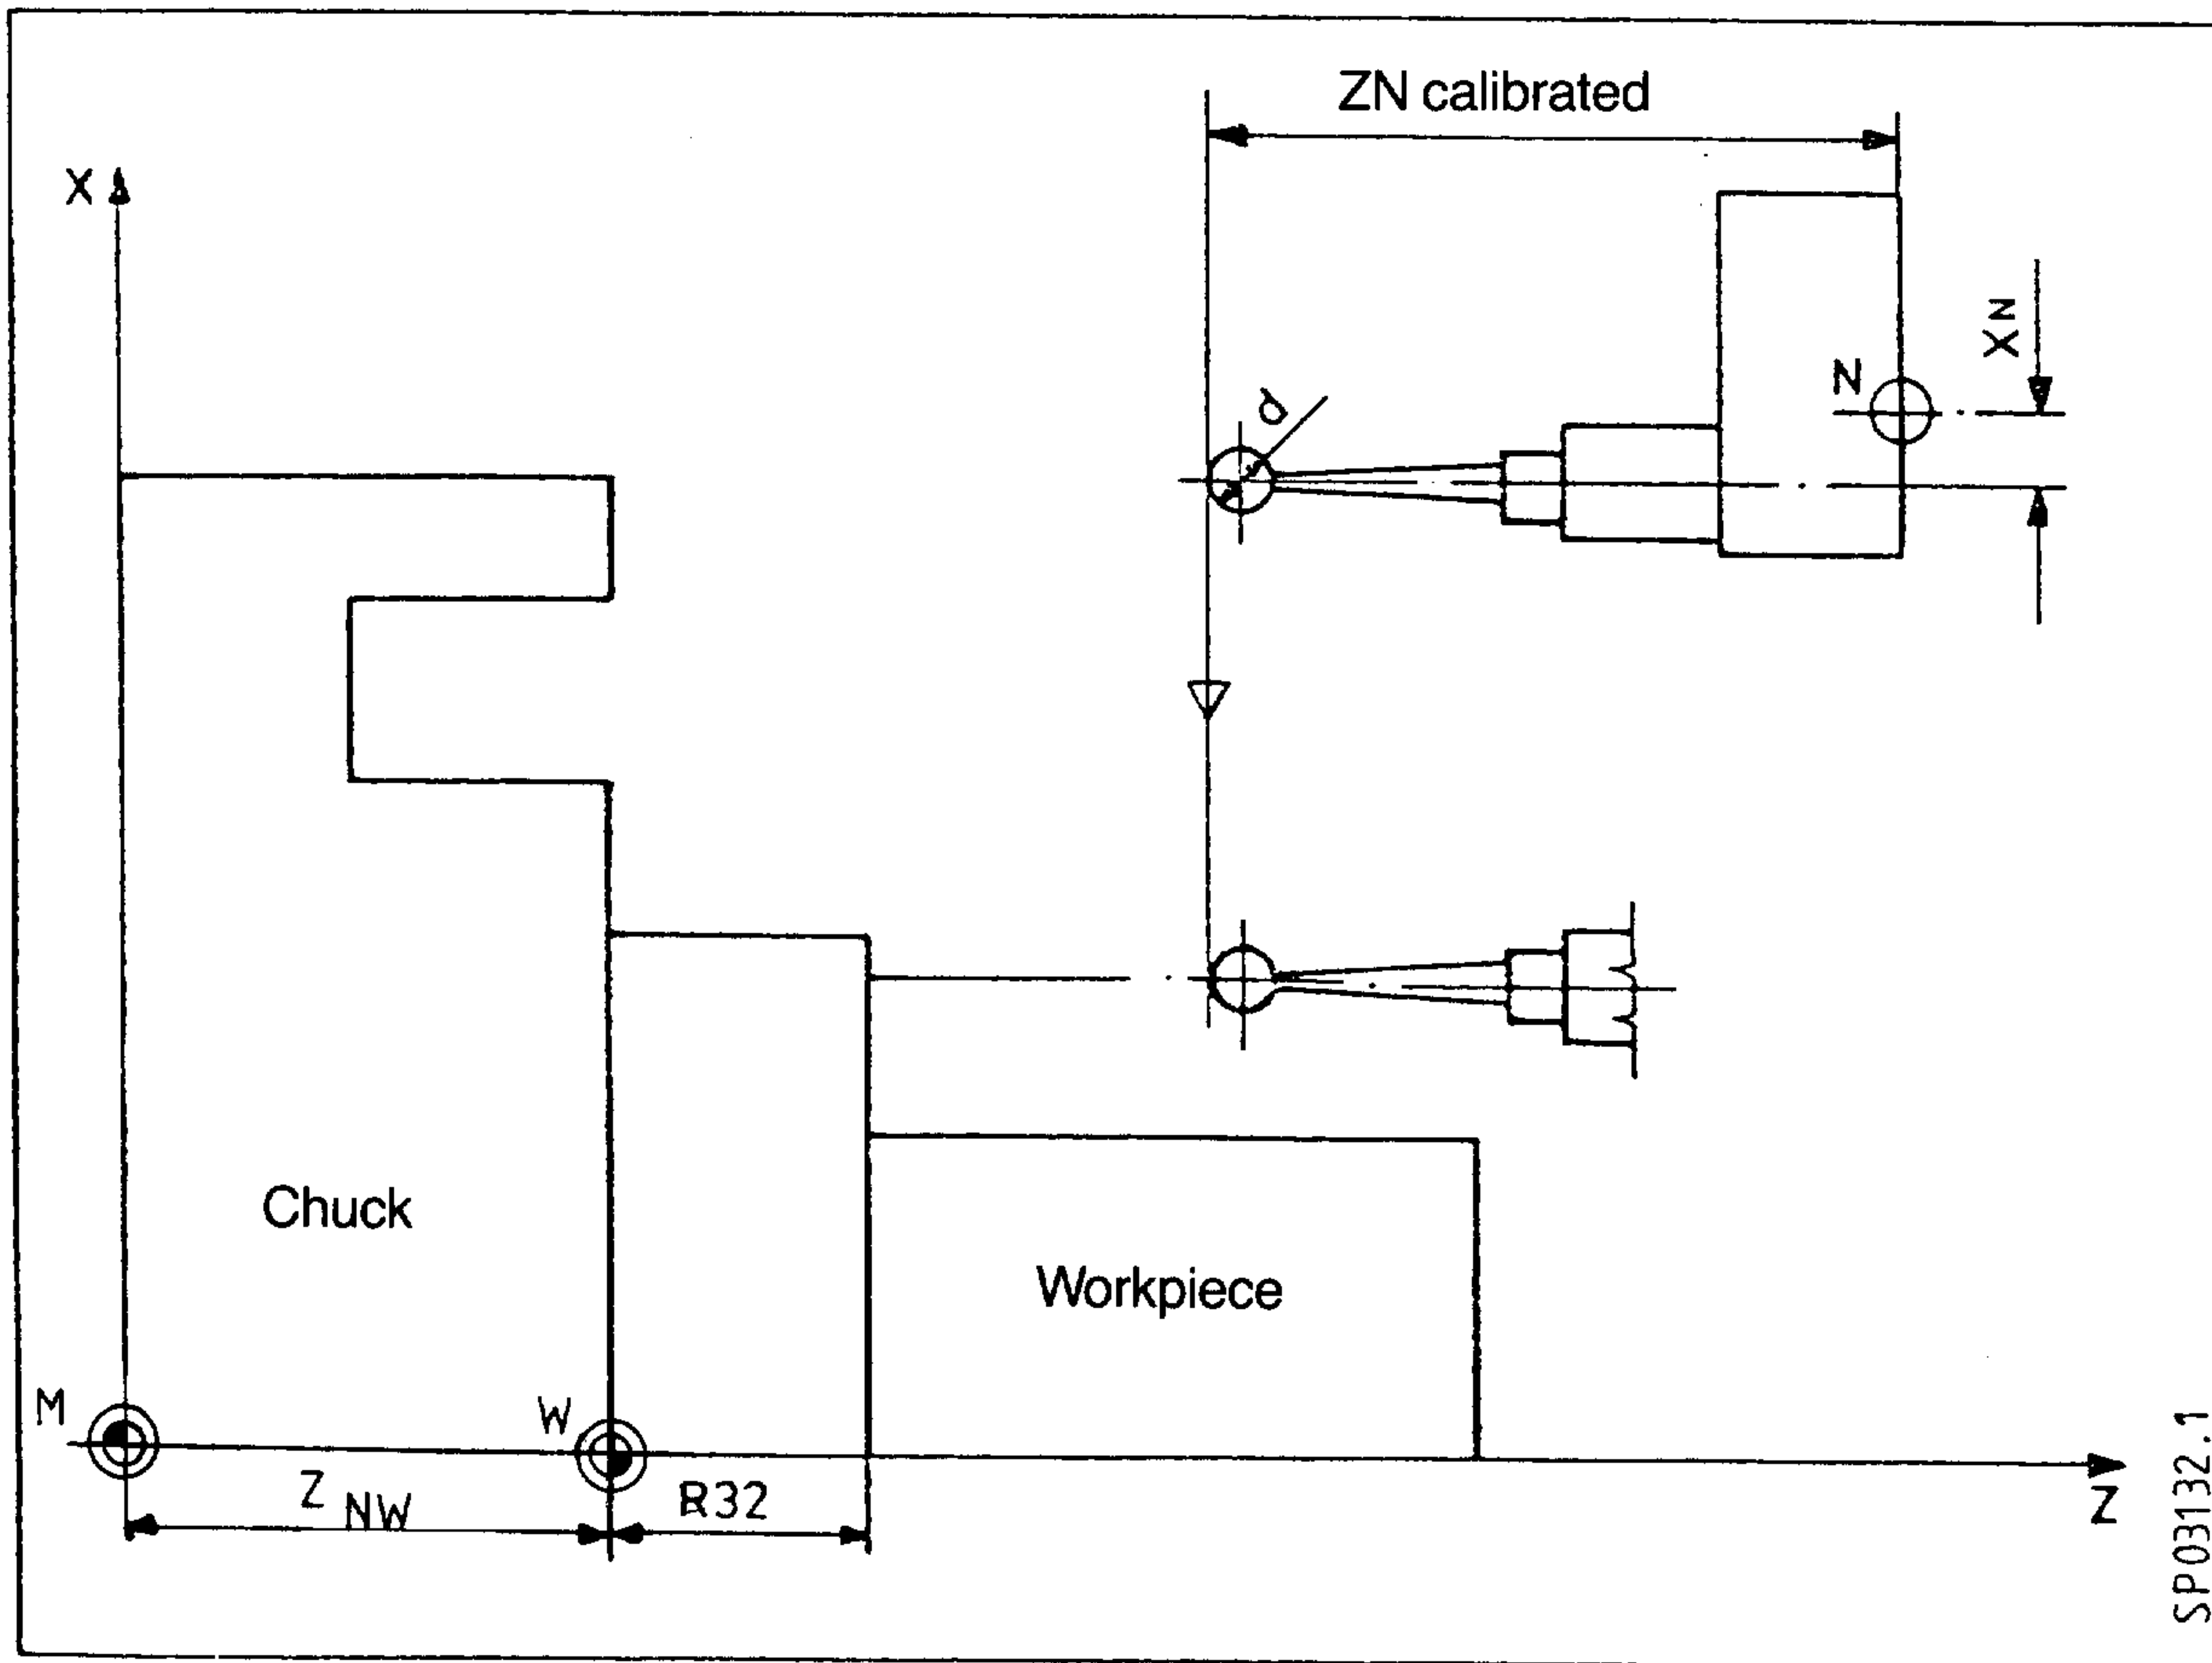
Positioning at any surface with "Calibrate workpiece probe"
